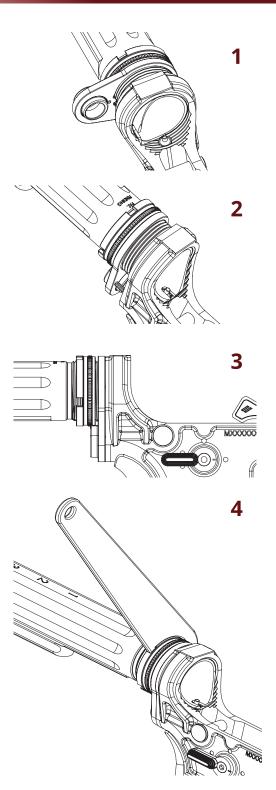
Depress the buffer detent to allow the buffer tube to rotate into installed position. Install takedown detent and spring.
